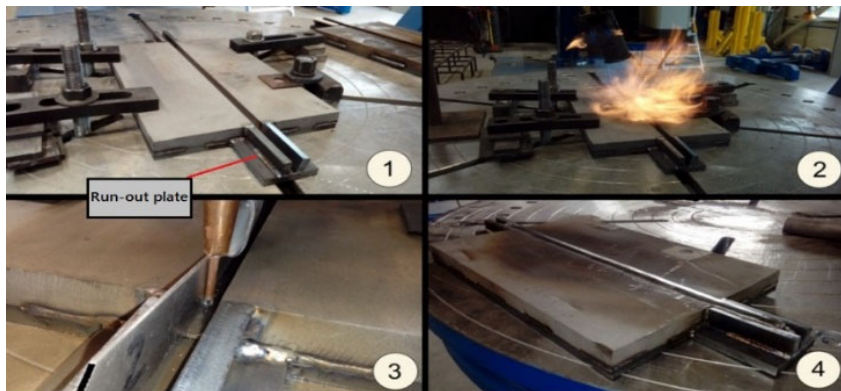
Welding process of the 25 mm S355JR sample: 1. Elements (plates) prepared for welding (with run-out plates), 2. Heating up the sample, burning off water and oil residues, 3. Positioning the welding wire in the throat of the groove before welding the root, 4. Fully welded sample
